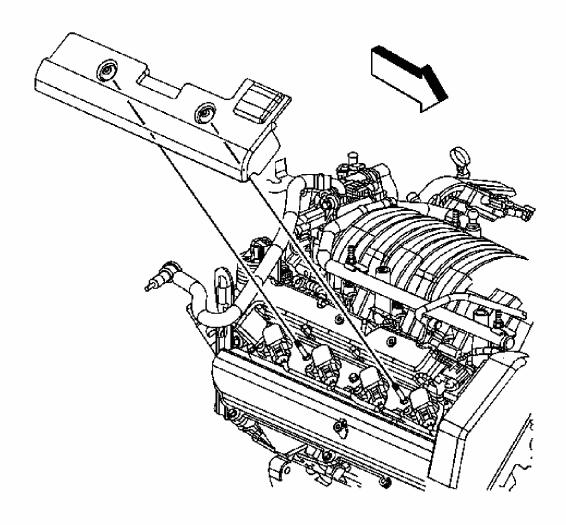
Identifying Rear Intake Manifold Sight Shield Courtesy of GENERAL MOTORS CORP.
